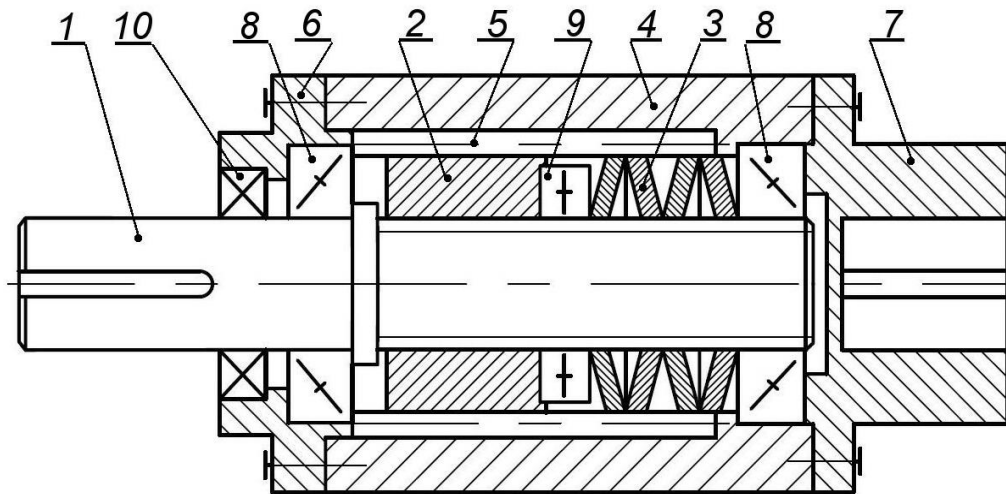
Diagram of one-way torsional flexible clutch [6]: 1 - clutch shaft, 2 - sliding sleeve, 3 - plate spring assembly, 4 - clutch housing, 5 - splined connection, 6 - closure cover, 7 - clutch hub, 8 - tapered bearings, 9 - thrust bearing, 10 - sealing ring.
